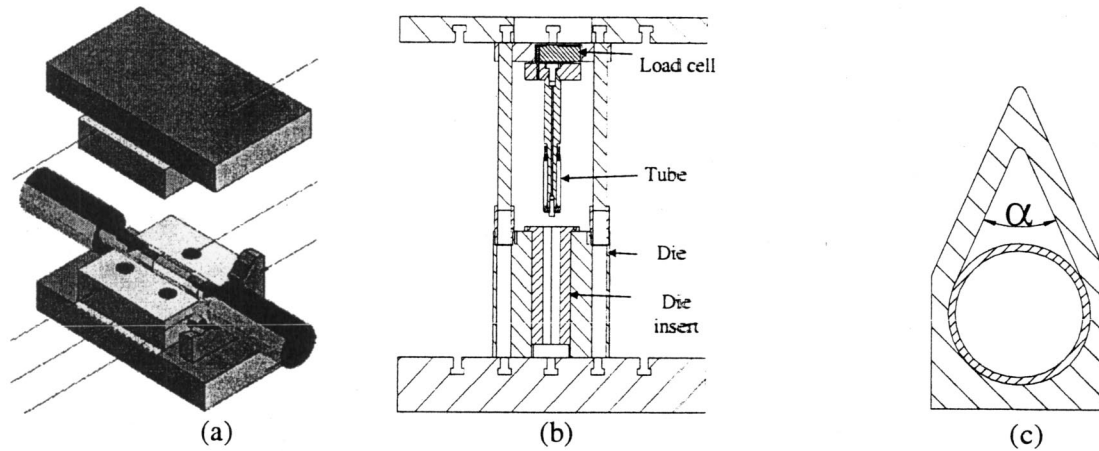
Some of the existing friction testing apparatus for hydroforming. (a) University of Darmstadt's testing tooling for guiding zone friction measurements [8,36], (b) OSU's test tooling for guiding zone friction measurements [37], (c) OSU's test tooling for expansion zone friction measurements [37]
